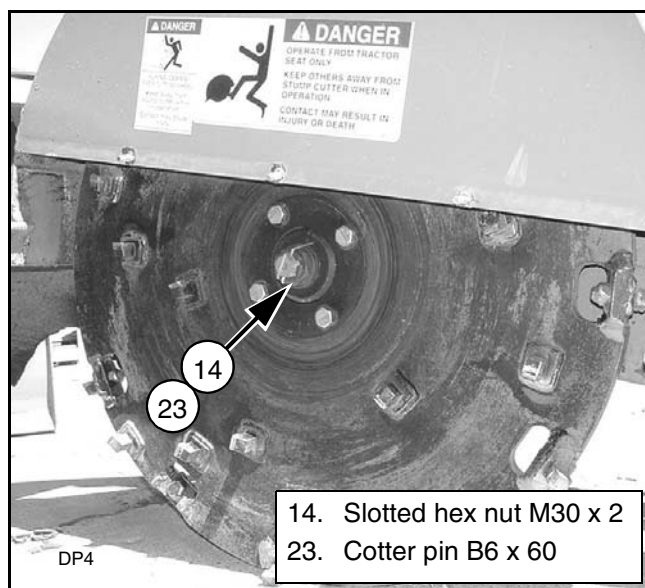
Cutting Wheel and Hub Assembly (Side Shield Removed)
